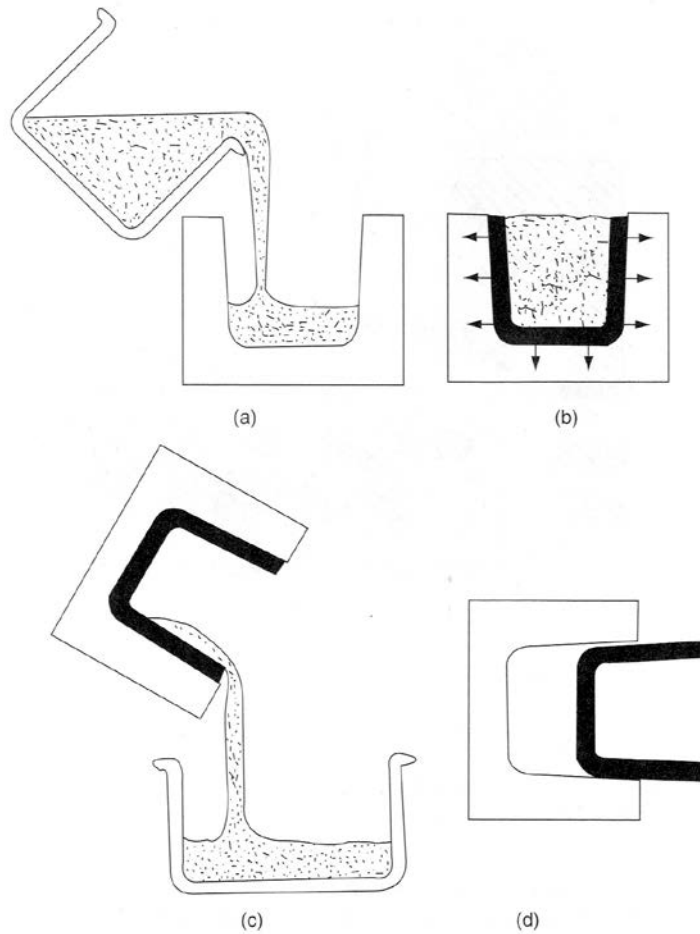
Schematic illustrating the drain-casting process, (a) Fill mould with slip, (b) mould extracts liquid, forms compact along mould walls, (c) excess slip cast drained, and (d) casting removed after partial drying [37]
